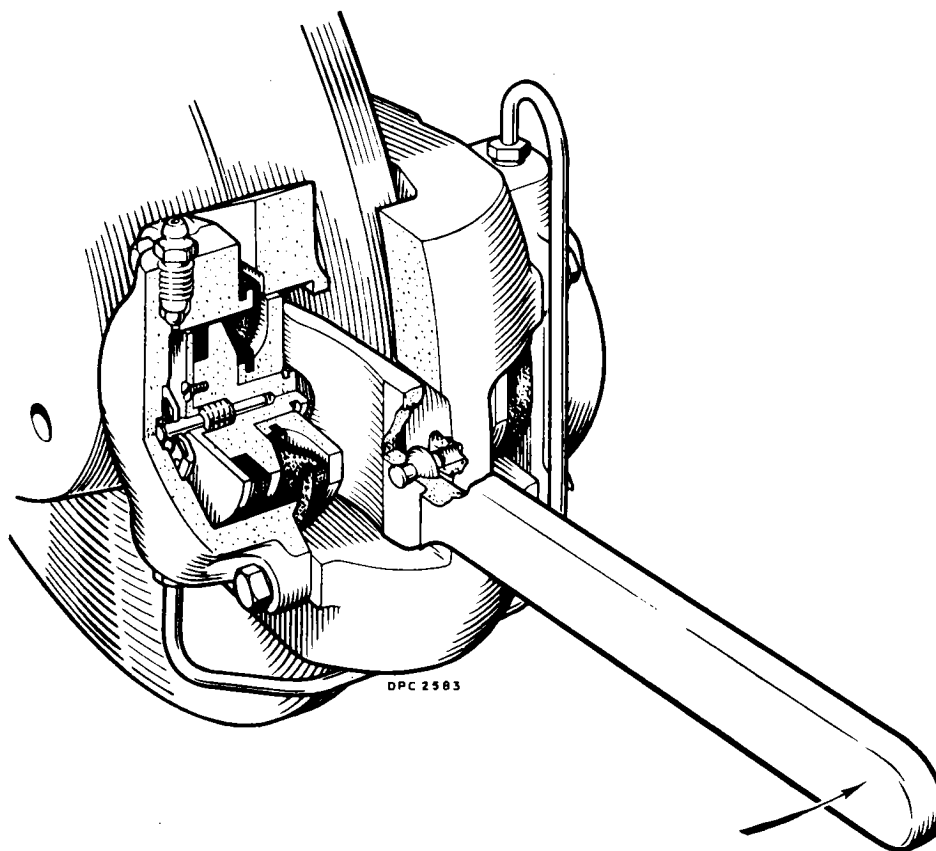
Resetting the pistons with the special tool (Part No. 7840)
